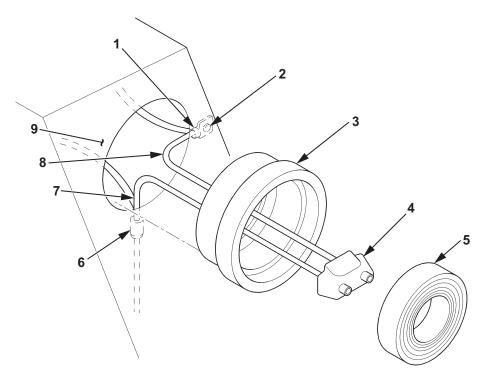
Side Marker Lamp Assembly Removal and Installation.
